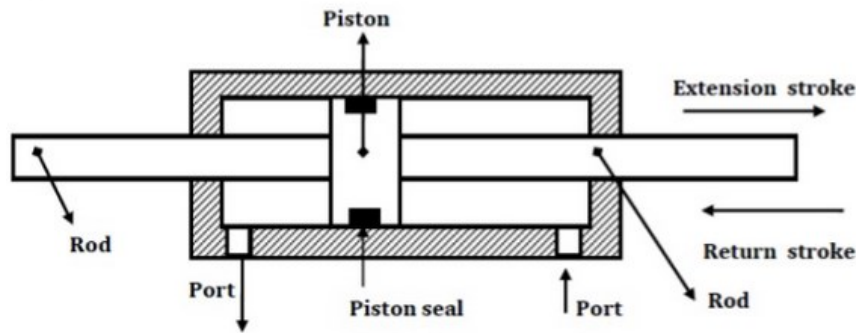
Double Acting Hydraulic Cylinder with Piston Rod [27]
